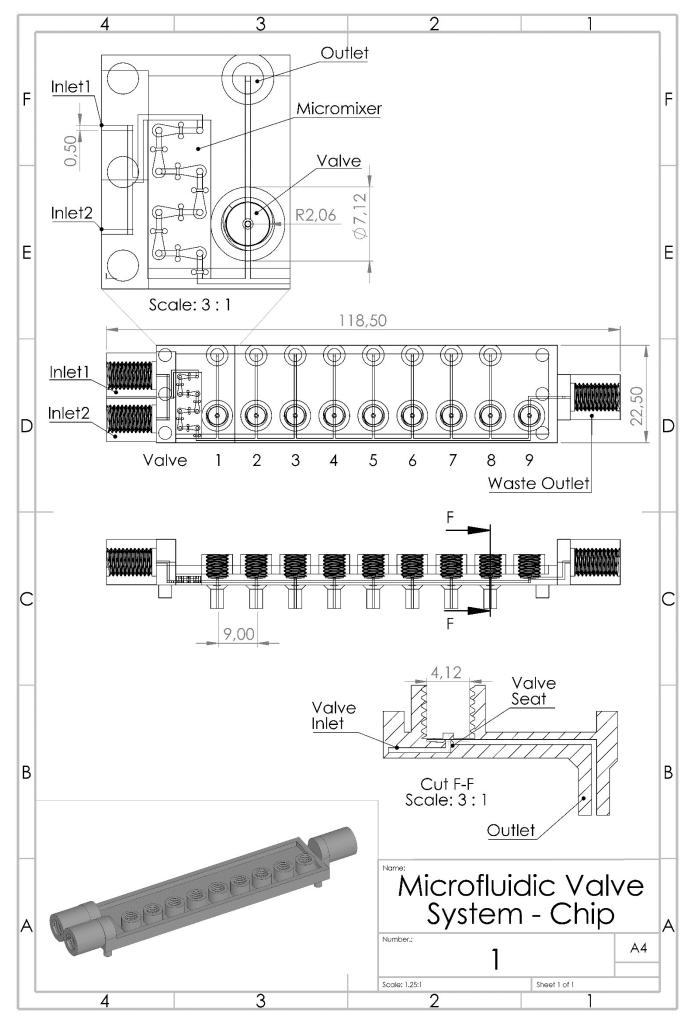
Technical drawings of the 3D-printed microfluidic valve system.
